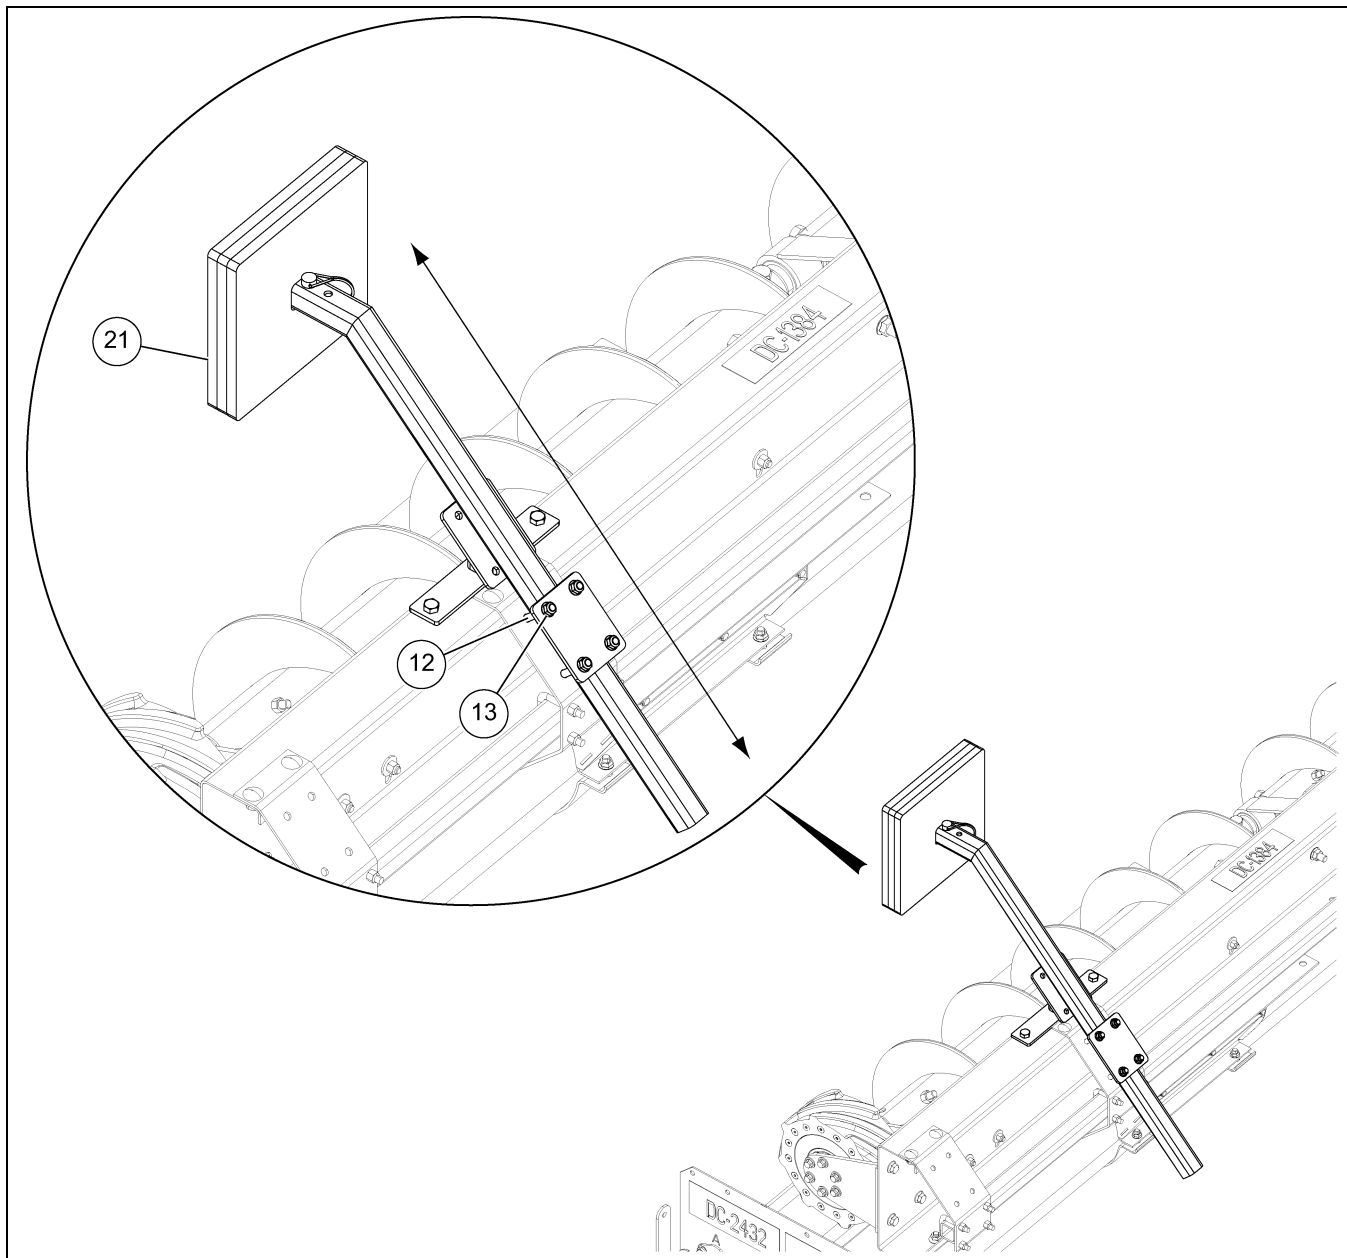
Adjusting the Backshield Counterweight Kit Assembly
